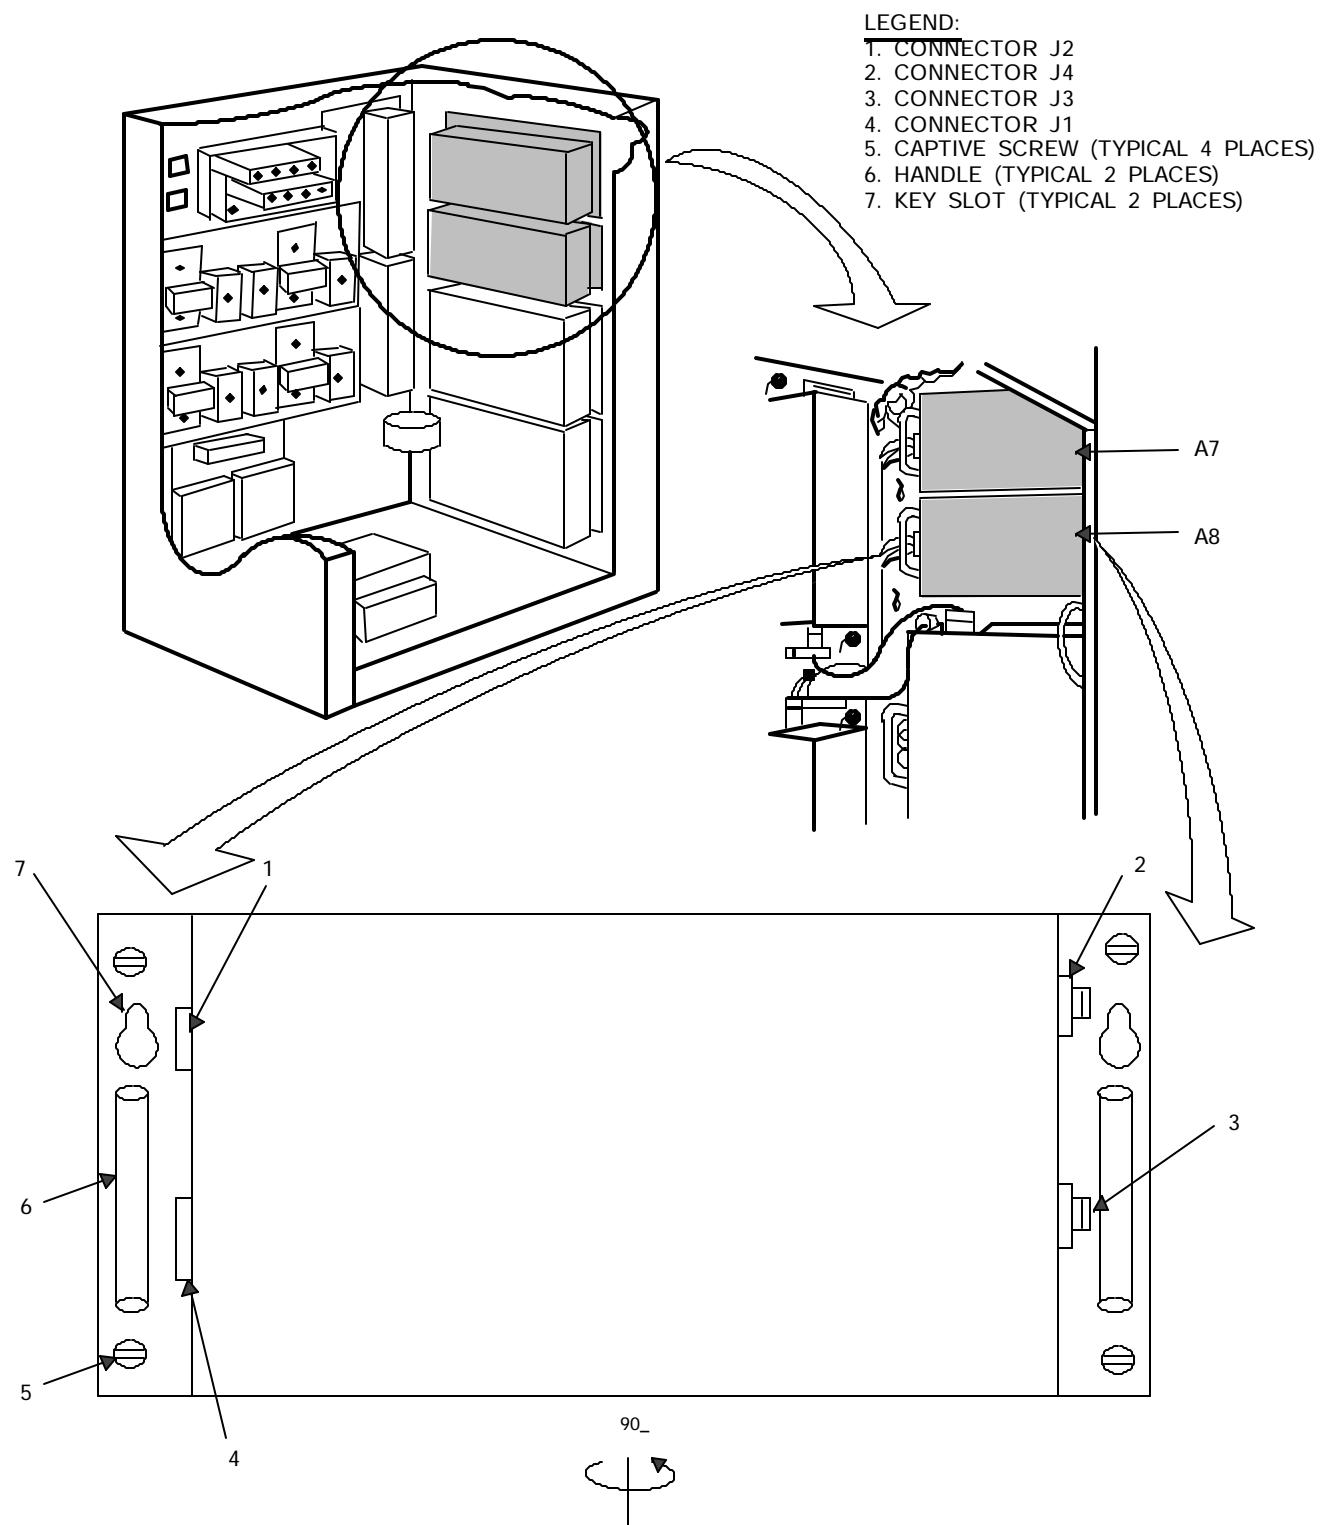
AUXILIARY MODULATOR/DRIVER A7 AND PRIMARY MODULATOR/DRIVER A8 REMOVAL AND INSTALLATION DIAGRAM
